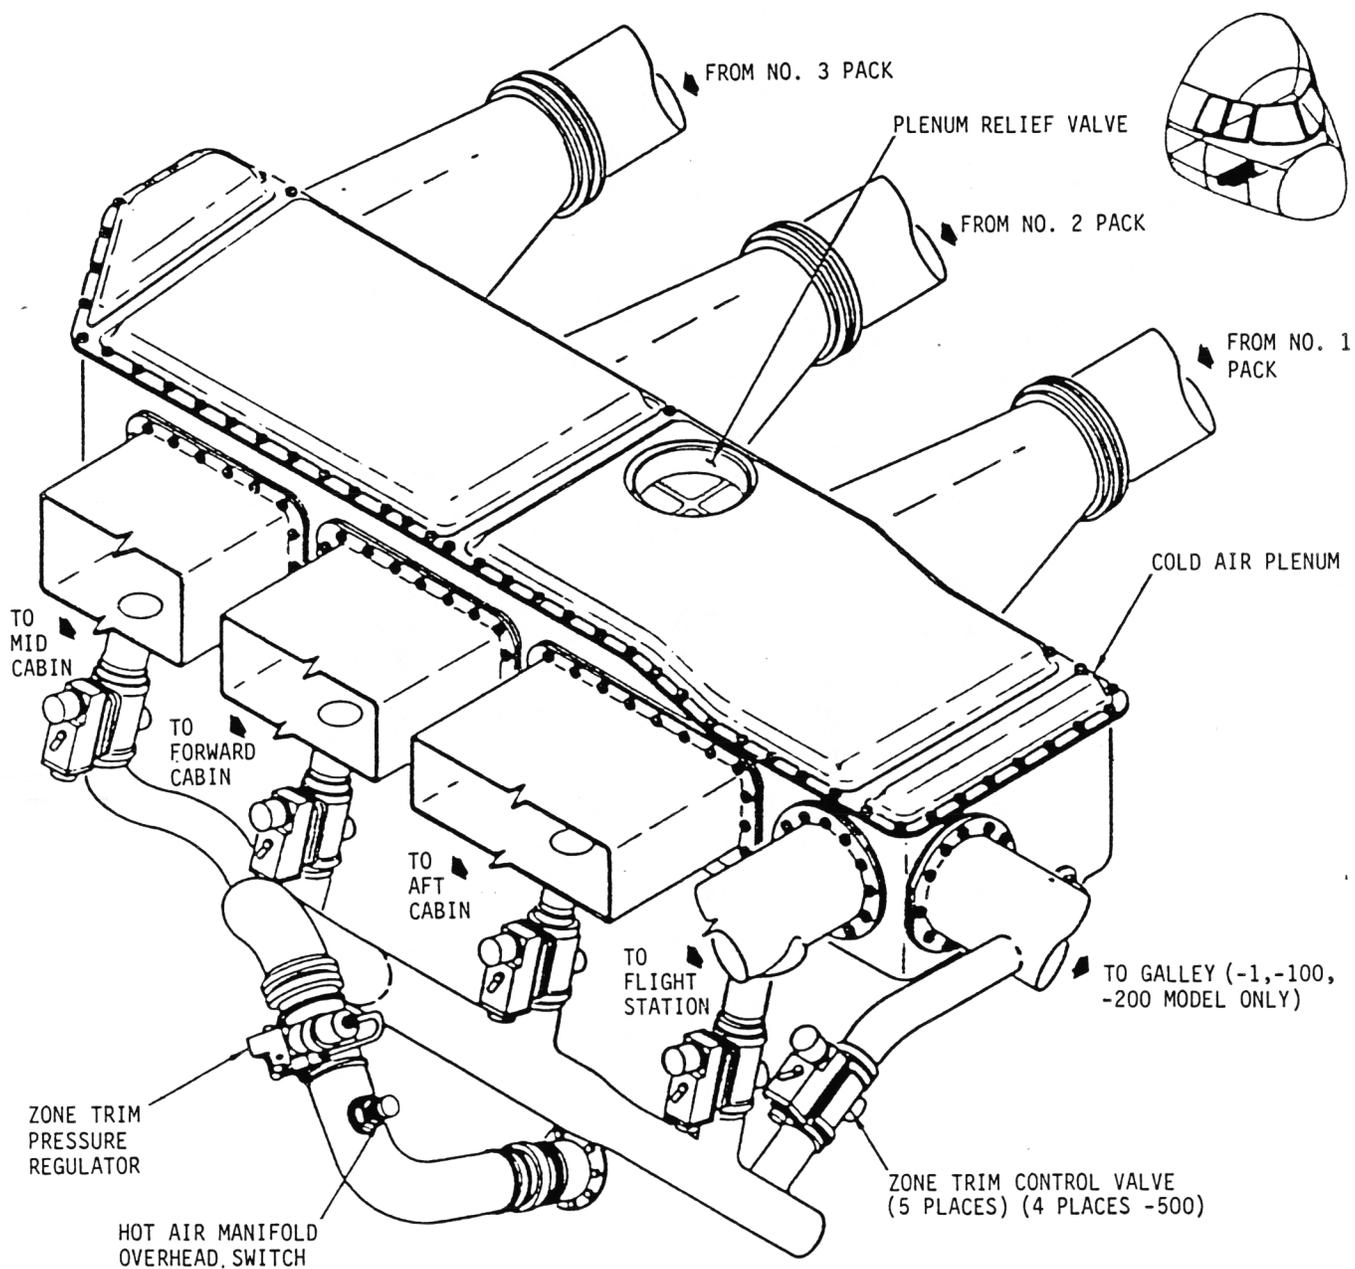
LOCKHEED L-1011 COLD AIR MANIFOLD
